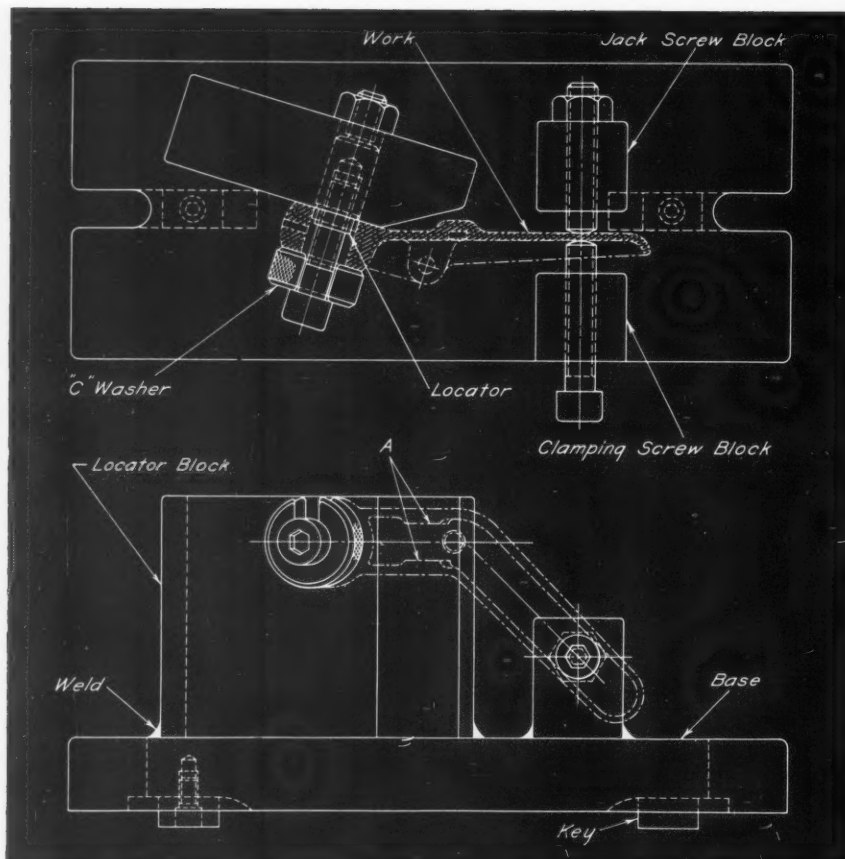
Milling fixture for an odd-shaped cast handle is of welded construction, and securely clamps the work as shown
